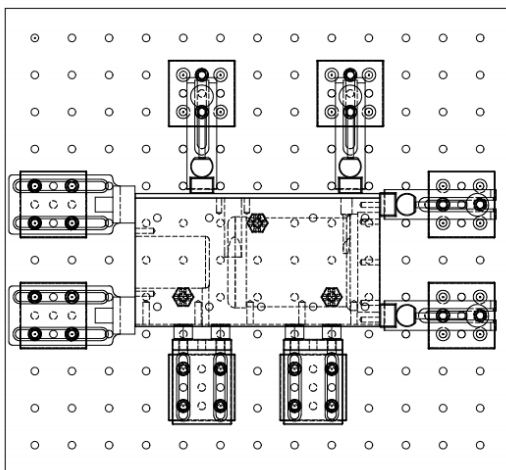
Final assembly of modular fixture design for hydraulic cylinder
